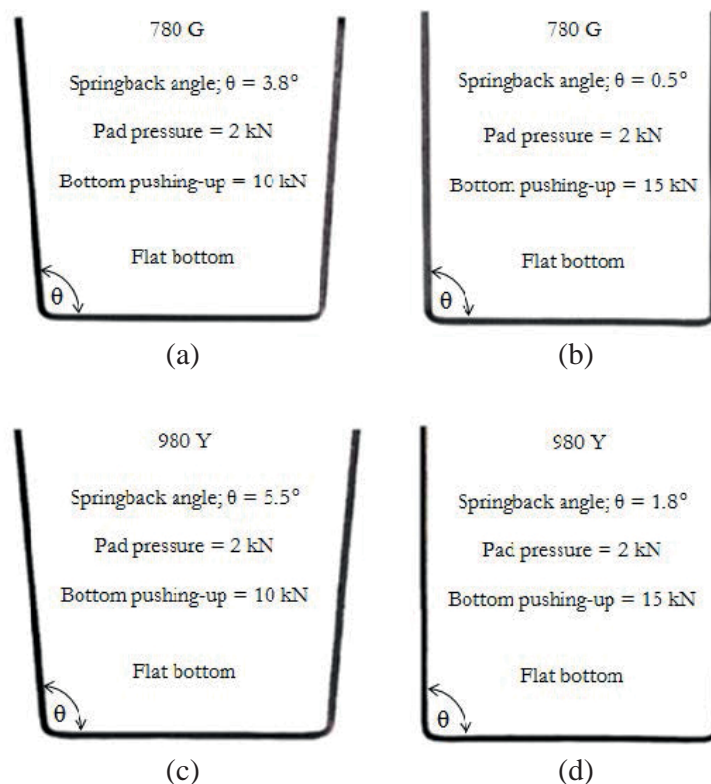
Schematic illustrations of bottom pushing-up technology
